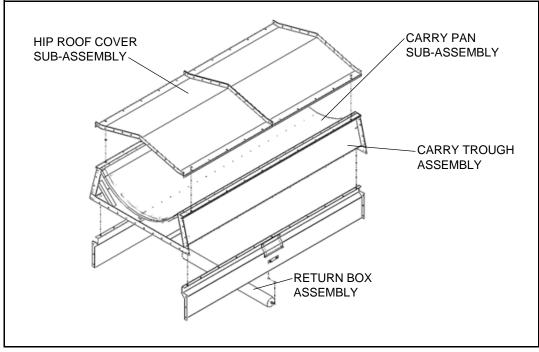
Exploded Isometric View of Intermediate Section w/ Air Return
